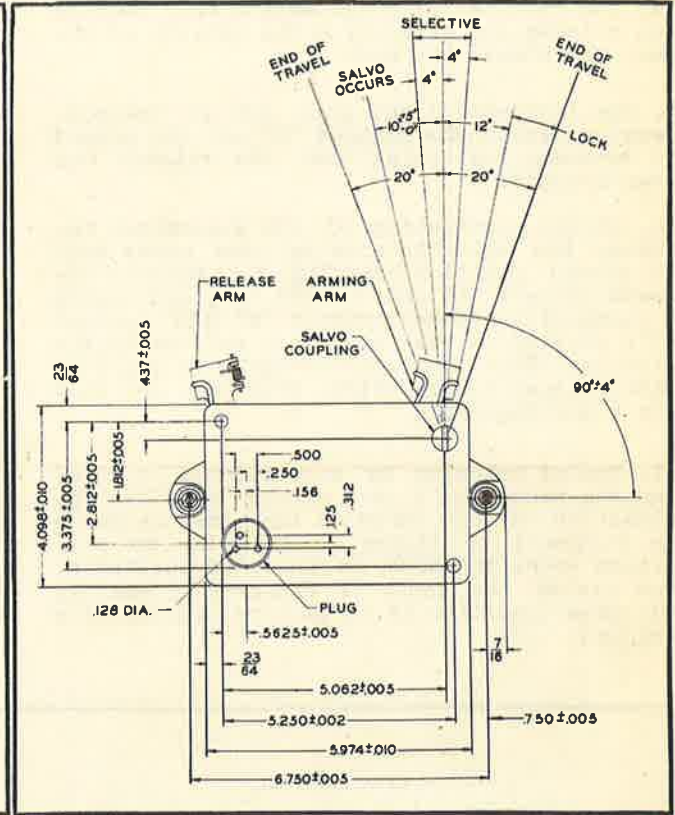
Dimensional Drawing and Salvo Coupling Movements - Left-Hand
